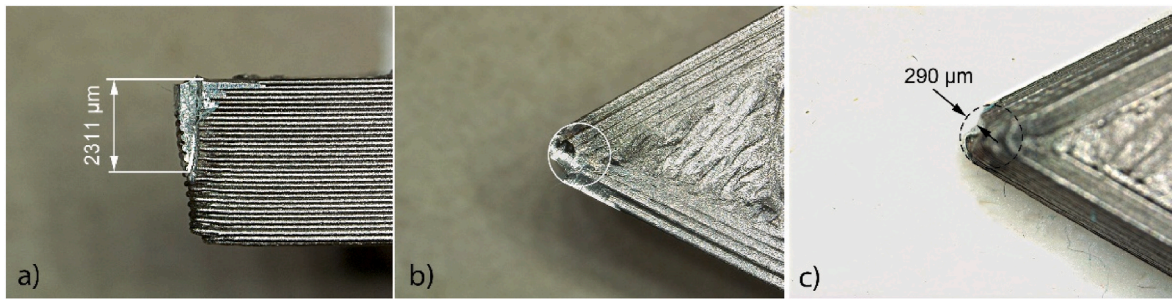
Appearance of the cutting edge at the end of run E1: a) side view, b) top view, d) bottom view ( $V_c = 160$  m/min,  $f = 0.15$  mm/r,  $a_p = 0.6$  mm,  $t = 1740$  s).
